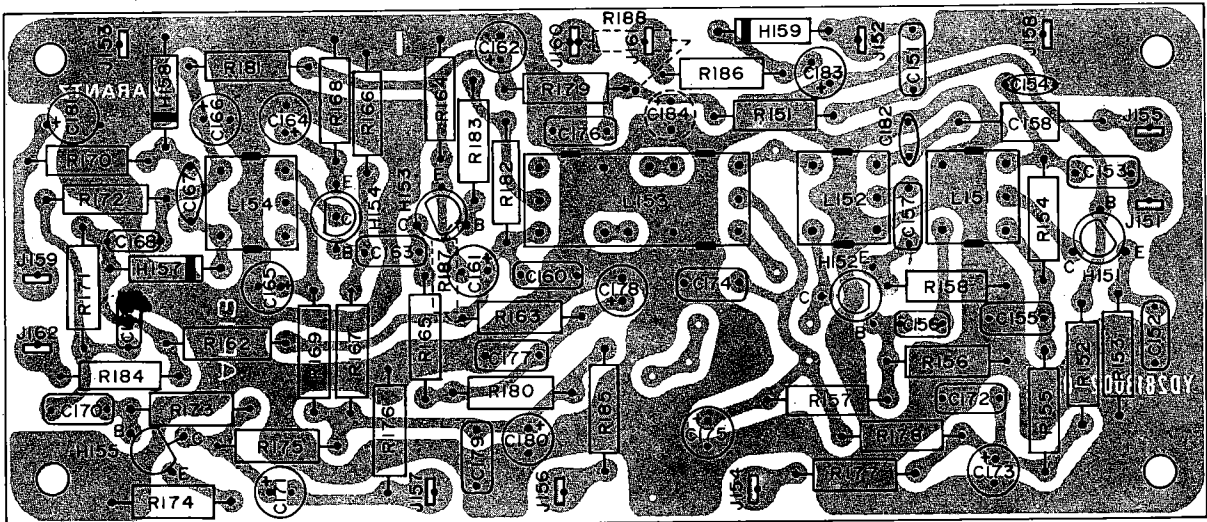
AM Tuner Unit Assembly P150 Component Locations
